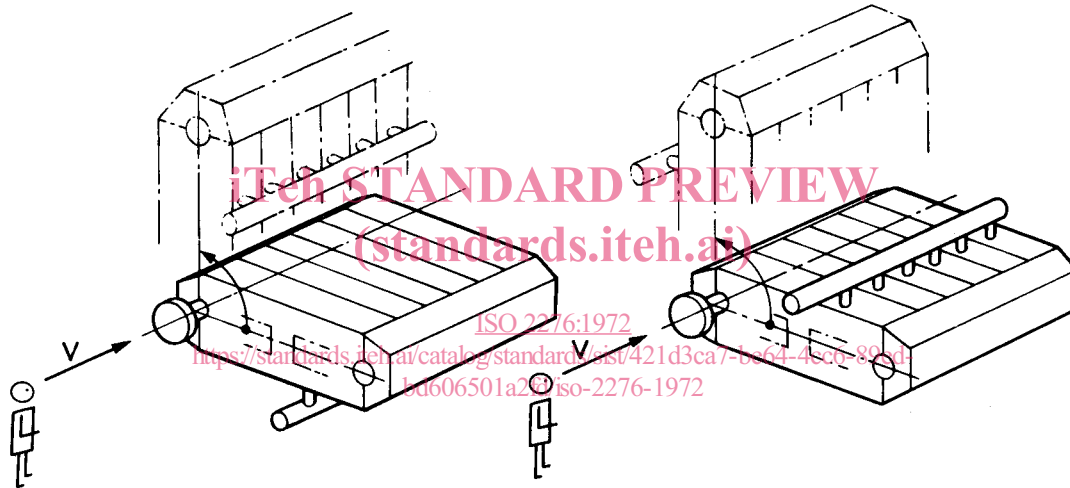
Right-hand single bank opposed piston engine FIGURE 3d – Left-hand single bank opposed piston engine
